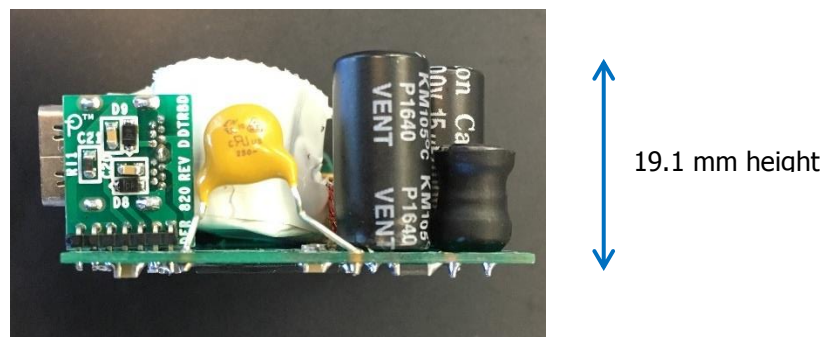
Populated Circuit Board Photograph, Entire Assembly.
